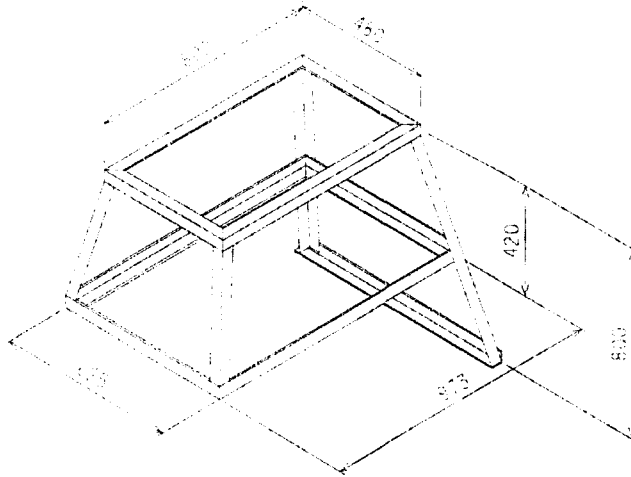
'Stepped' truss downstream of the test section (dimensions in mm)
